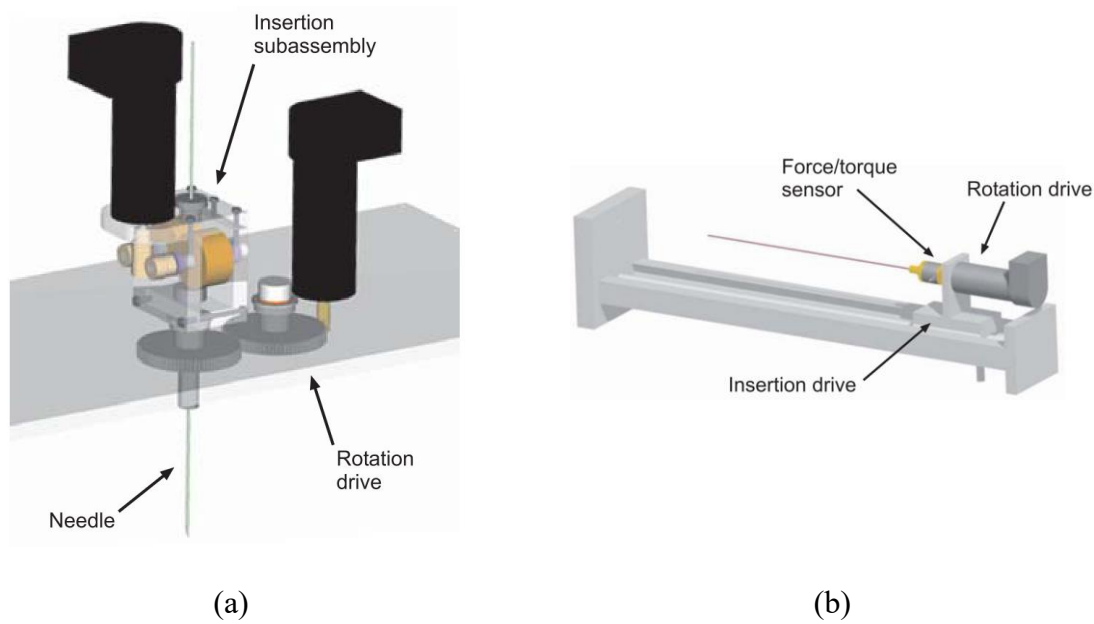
CAD model of steering devices, (a) Friction drive device, (b) Telescoping support device [62].
